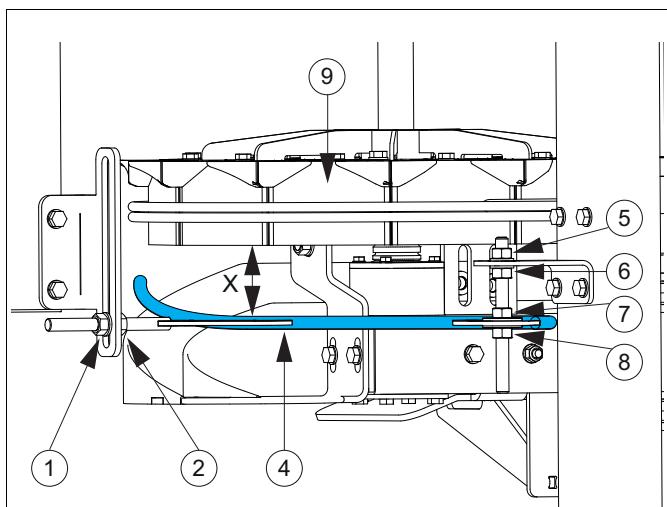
Adjust the unloading ramp outside shackle guide vertically
